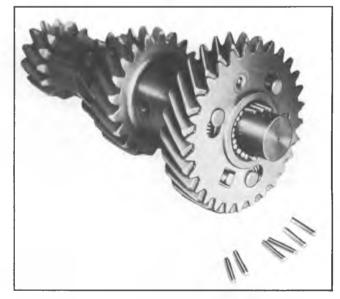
A-Loading Countergear Bearings w/Tool J-22246
